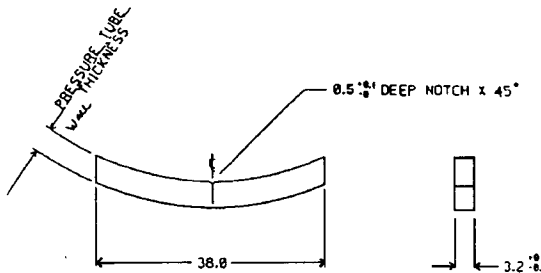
Schematic Drawing of Cantilever Beam Specimen(CB)
